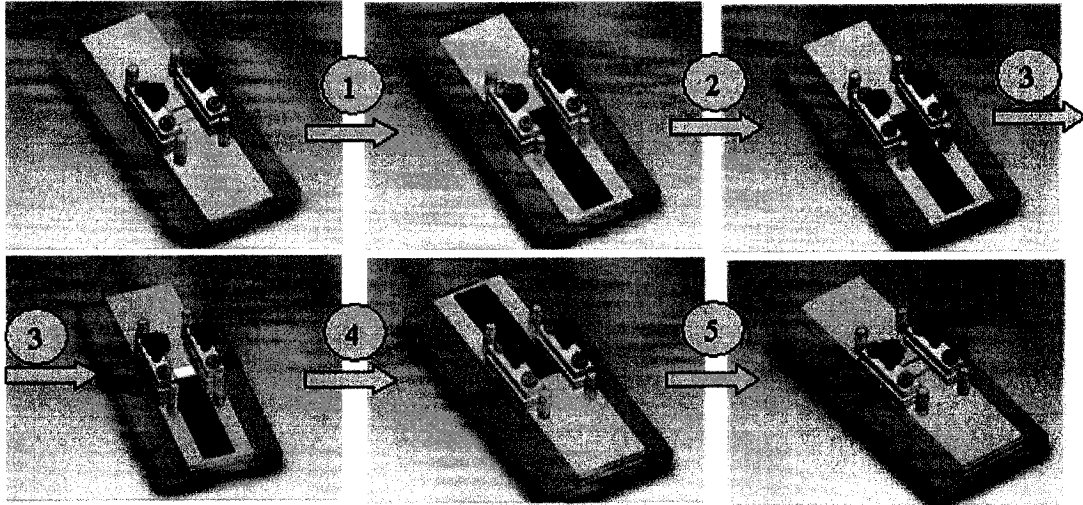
shows a the resistance welding jig, consisting of copper connectors, ceramic sample holders and insulators, guiding rods for the ceramic insulator, the glass fibre/epoxy insulating base and a spacer underneath the second ceramic holder.
